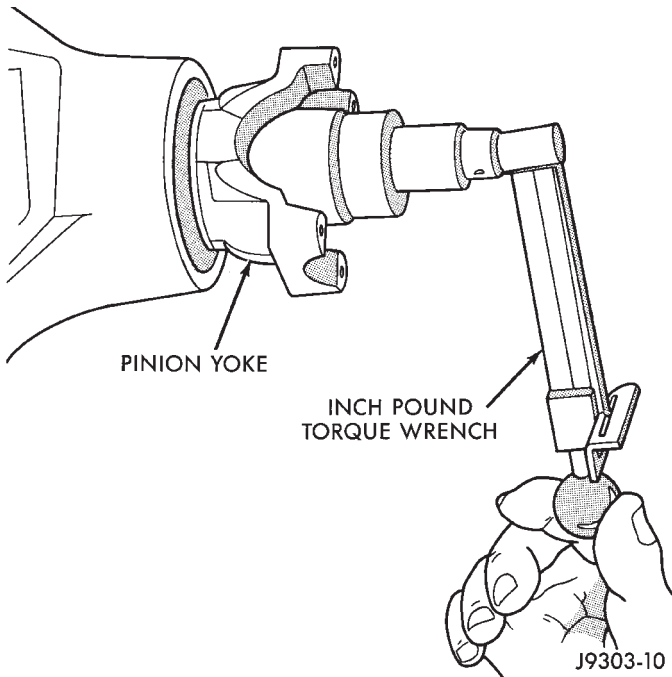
Check Pinion Gear Rotation Torque—Typical
